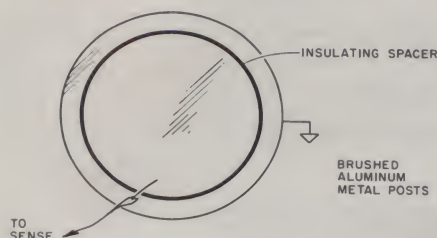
Mechanical details of a ring-like touch pad. Outer and inner surfaces are made of brushed aluminum.
